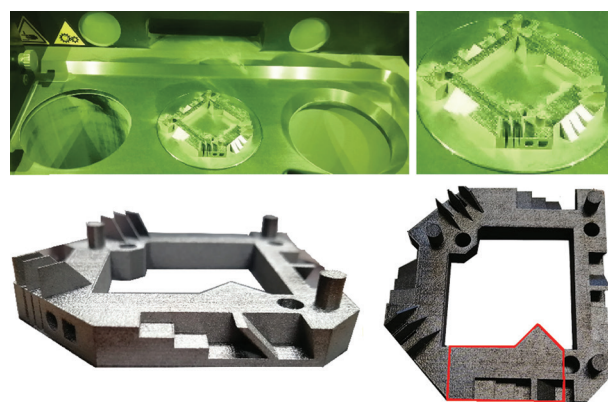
3D-printed studied maraging steel part as built inside the machine and connected to the substrate plate (top); final part and cut material sample (bottom)
